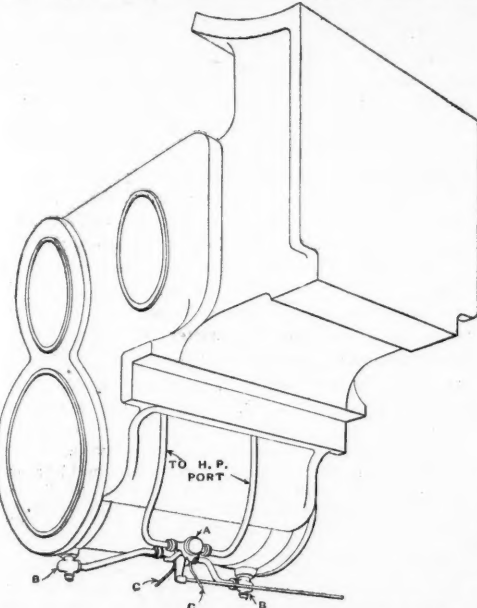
Combined Starting Valve and Cylinder Cock for Compound Locomotive.
